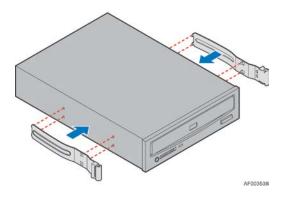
Tool-less Rails Mounting 5.25" CD-ROM Drive
